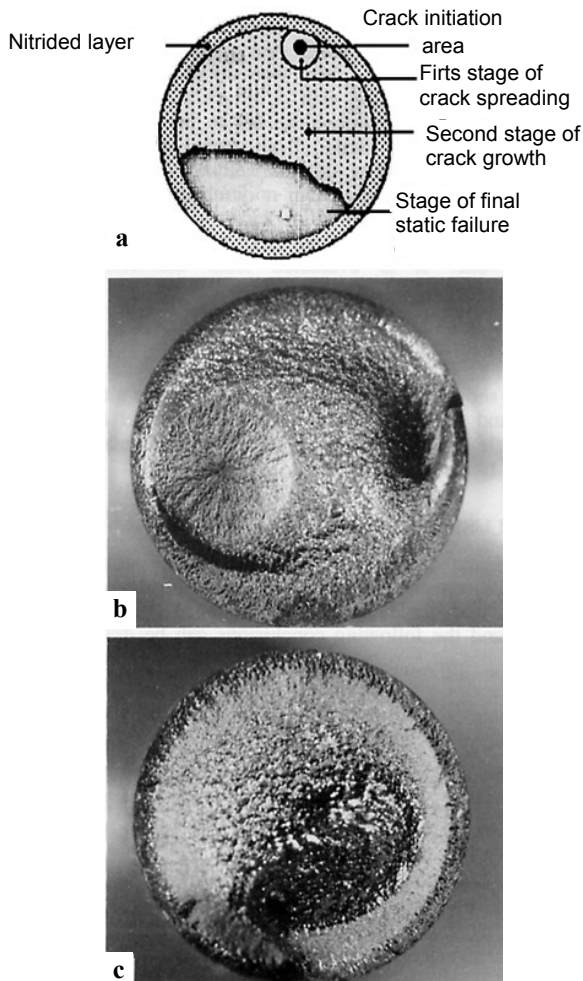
Character of macrofailure of nitrided specimens: a – the scheme of fatigue fracture with near surface initiation of a crack; b – fracture surface of grade 42CrMo4 steel tested at low cycle fatigue; c – fracture surface of the same steel tested at high cycle fatigue
